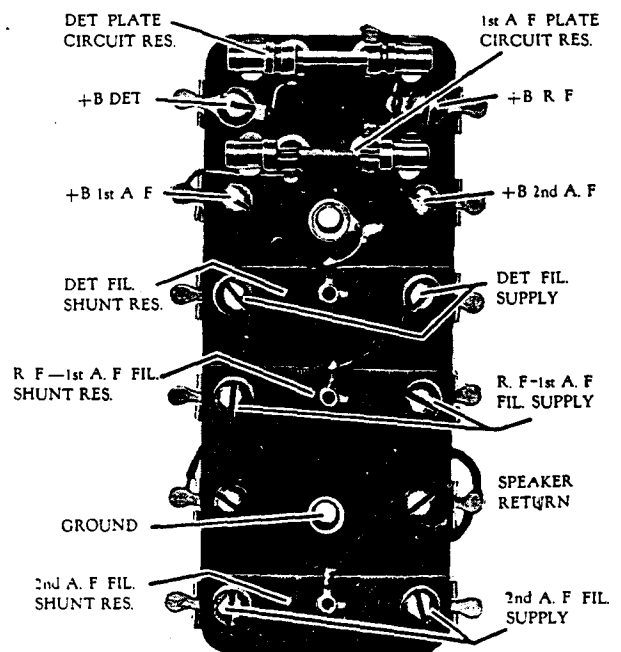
BOTTOM VIEW OF PANEL ASSEMBLY USED IN POWER UNIT OF MODELS 40, 42, 44 AND 52
